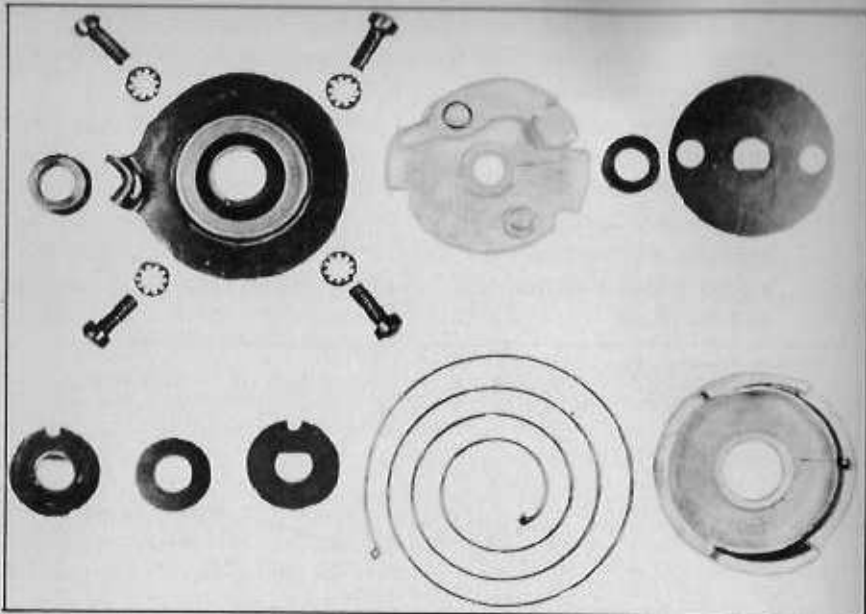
MAGNETO IMPULSE COUPLING DISASSEMBLED
